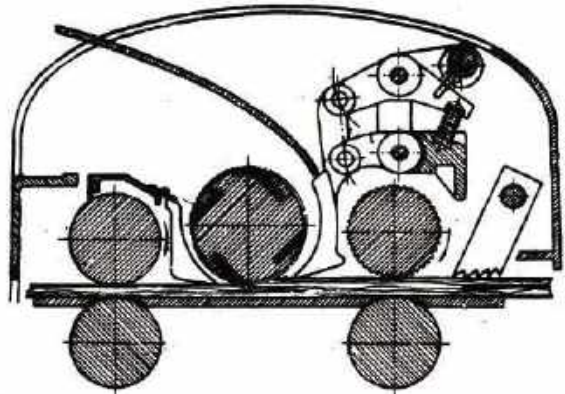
DETAIL OF THE CUTTER HEAD AND ROLLS ON THE THICKNESS PLANER
